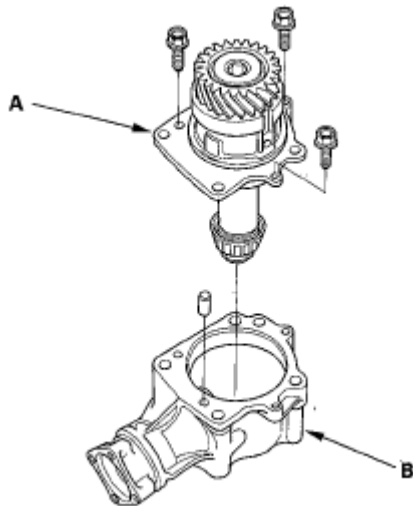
Identifying Transfer Holder Assembly And Transfer Housing
